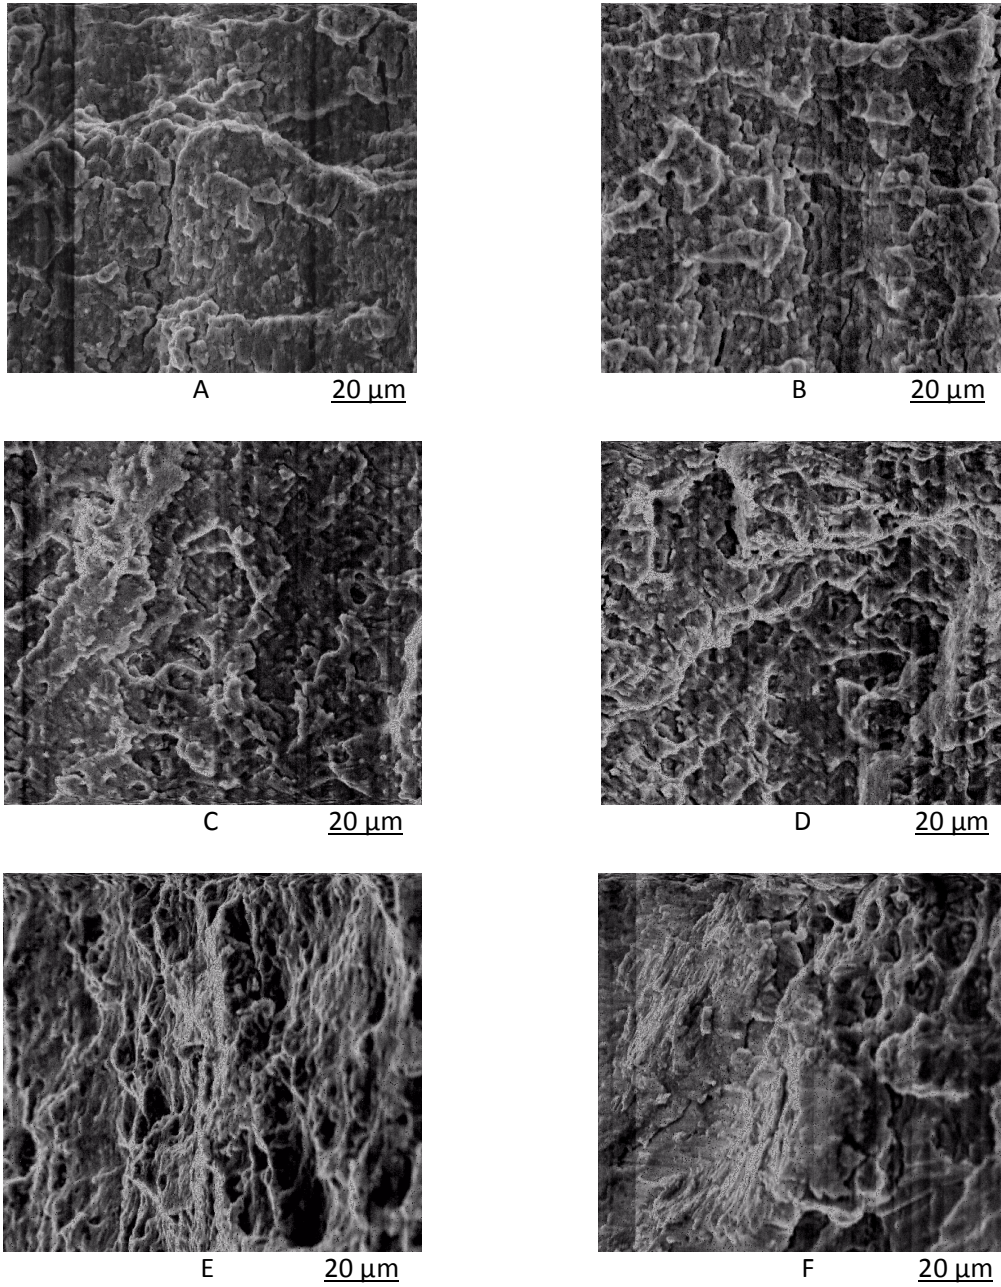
Fractographic surfaces of samples from aluminium alloy AK6 tested at $R = -19$ (a, b.), $R = -1$ (c, d.) and $R = 0,5$ (e, f.); a, c, e - crack stable growth zone I_s ; b, d, f - accelerated crack extension zone I_r
